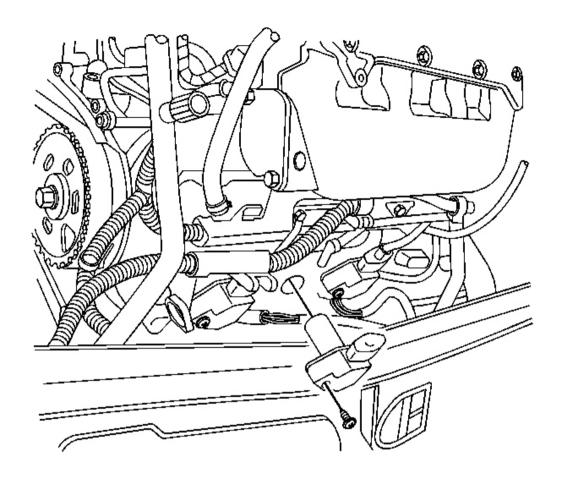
View Of Engine Coils Courtesy of GENERAL MOTORS CORP.
